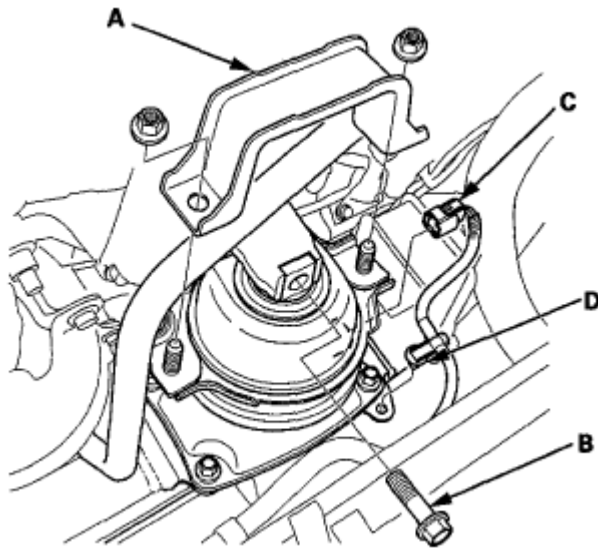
Identifying Front Engine Mount Stop And Front Engine Mount With Mounting Bolt
